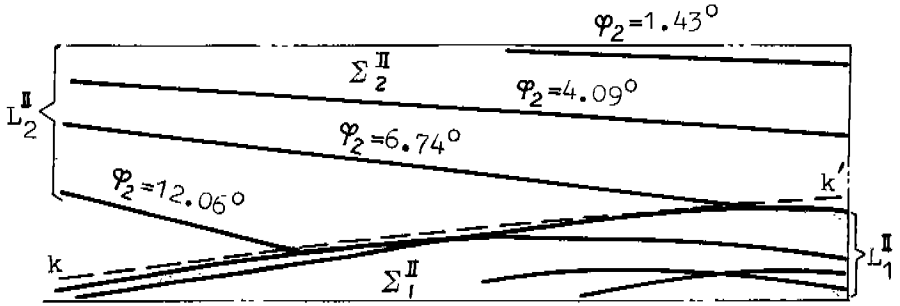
Instantaneous contact lines on a tooth surface of the gate rotor (the thickness of gate rotor is 0.6 cm)
